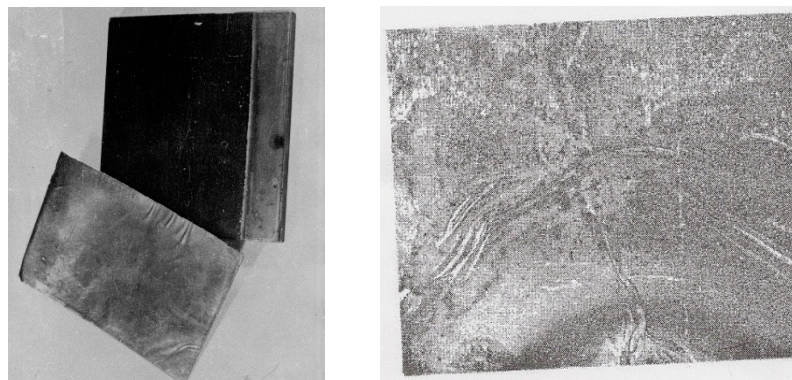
Example of removal of Cu-Ni coating (thickness 0.15 mm) from stainless steel base (thickness 1.1 mm) by direct impact on the coating with discharge current above 1kA: A – separated base and coating; B – macrostructure of coating surface
